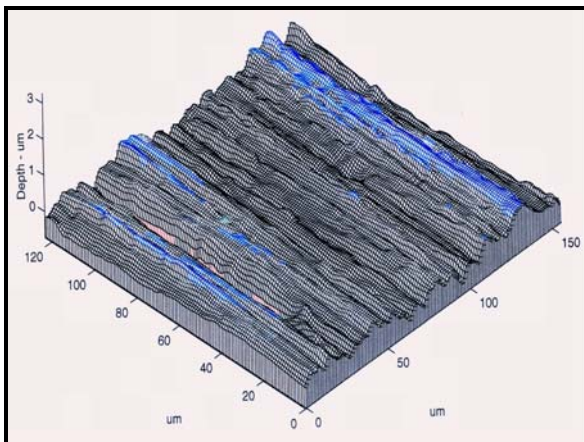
; Shows a 3-dimensional, magnified view of a section of the surface of a gear tooth. The tooth had
